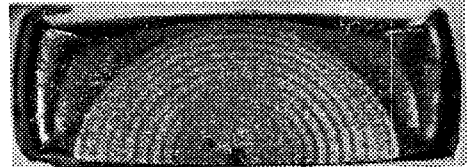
(a) Photo showing typical example of beach marked fatigue fracture surface of specimen with a pit (Axial Loading, $R=0.1$, type 304 stainless steel, sine wave, 10 Hz, room temp. in air)
